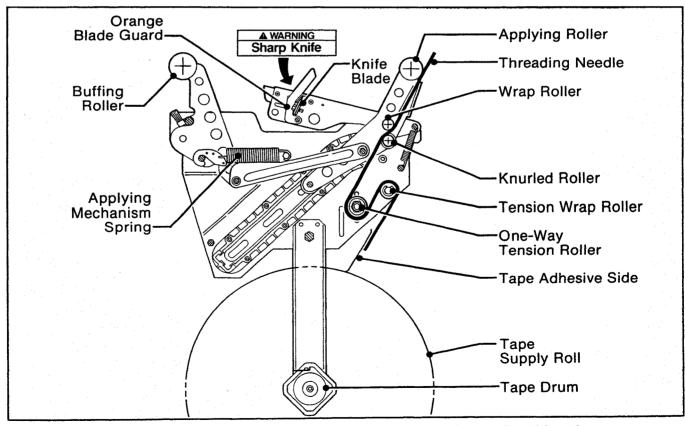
Tape Threading Diagram - Lower Taping Head - Left Side View
